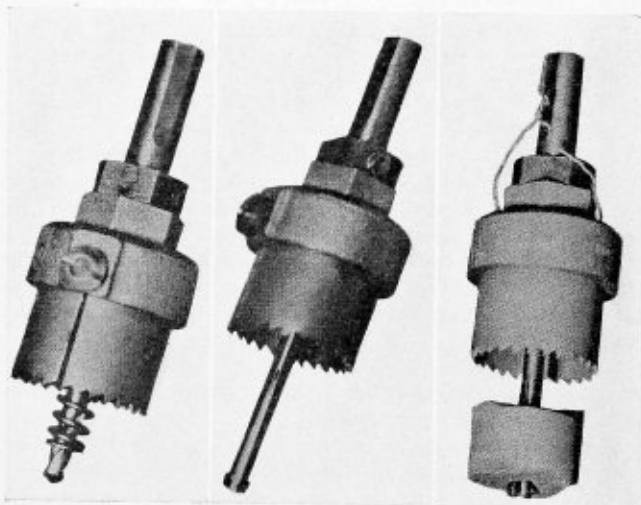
(Left) Tool used for trepanning plug from welded seam. Fig. 4—(Center) Special spring and split pilot developed for trepanning tool.
